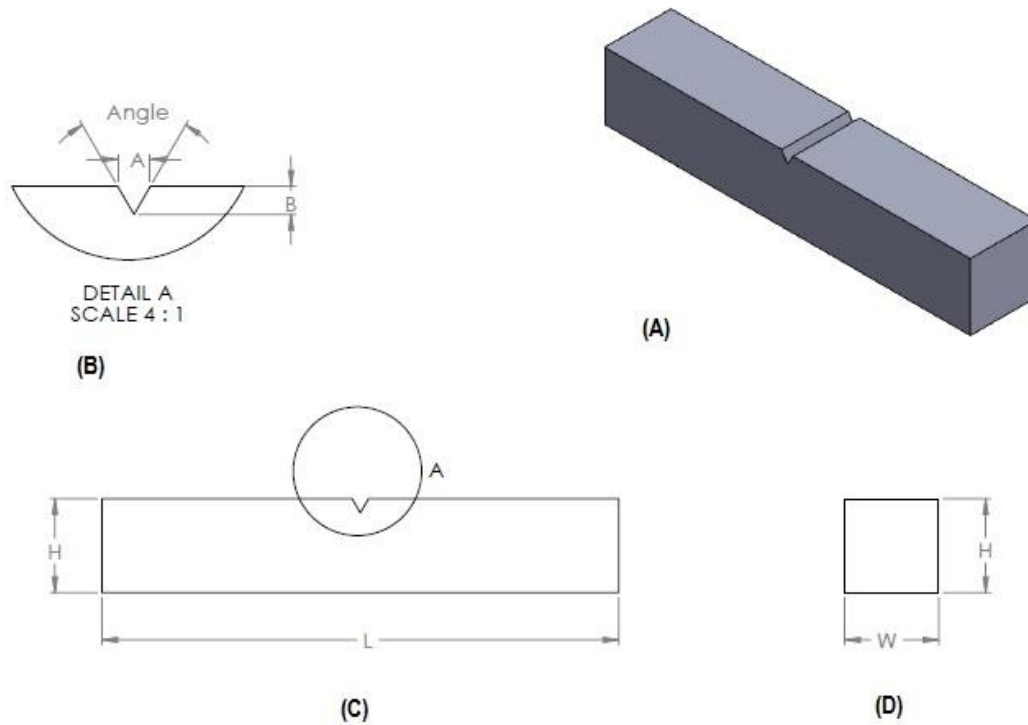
(A) CAD Model of Specimen, (B) Detailed view of notch, (C) Front View, (D) Side View
